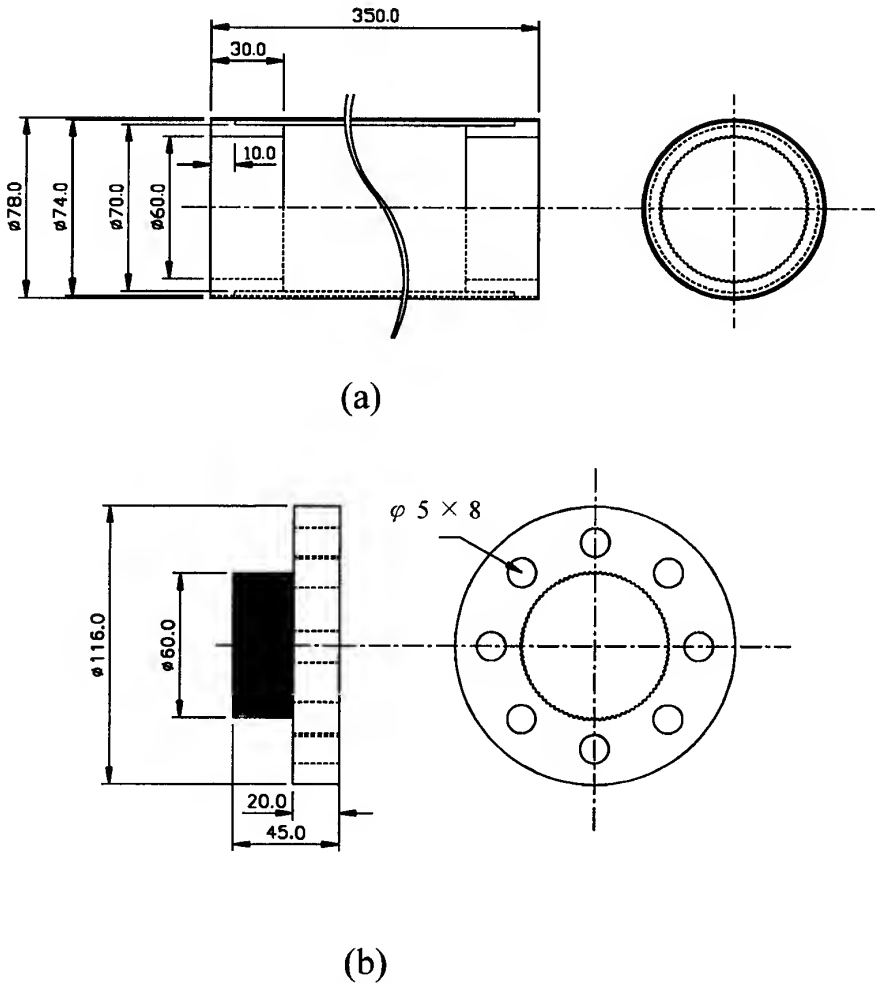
Dimension of the static torque specimen. (a) Hybrid drive shaft. (b) Outer serrated adapter for the installation in the static torque tester.
